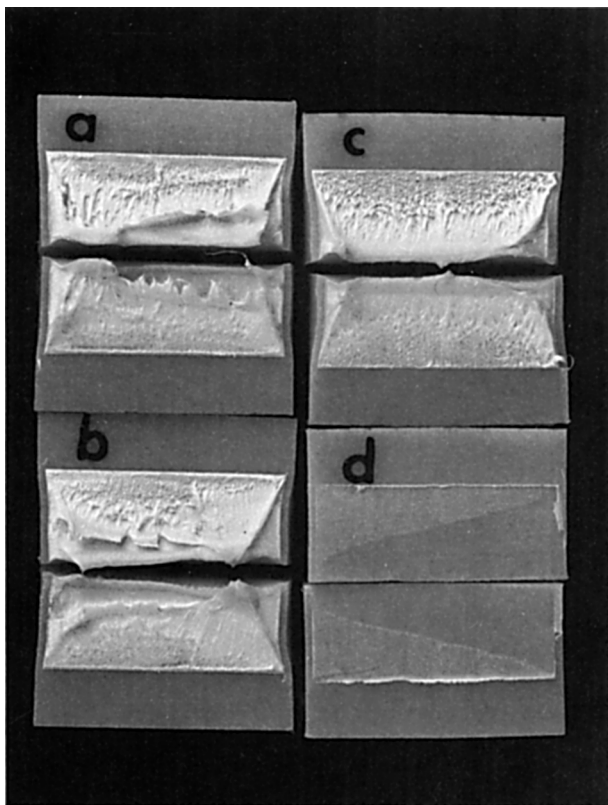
Fractured surface of weld joints contaminated by (a) Vaseline, (b) graphite, (c) and (d) Teflon. Weld pressure is 1.61 MPa for (a-c), and 0.31 MPa for (d).
